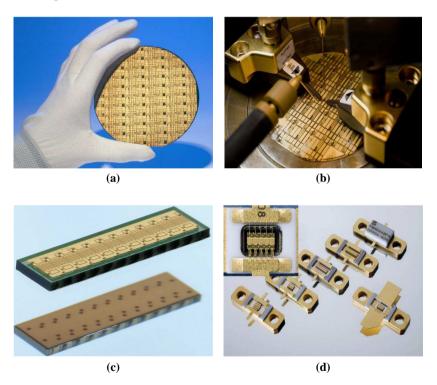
GaN HEMT packaging steps: (a) A Processed wafer , (b) Onwafer test (c) Diced device, (d) Device bonded in package
